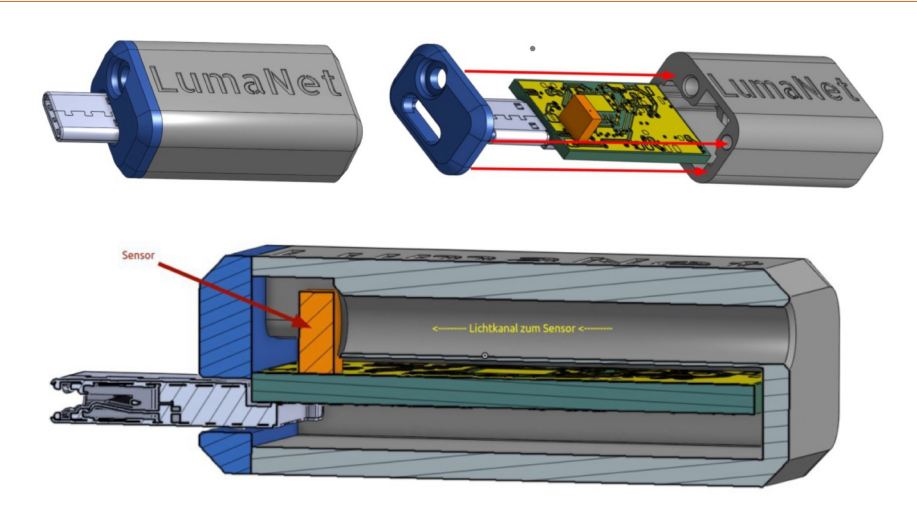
3D design of the plug-in sensor (top left). Explosion view of sensor with processing PCB (top right). Cross section of plug-in sensor shows the optical tunnel needed for detection. ©HTLR/SZK
